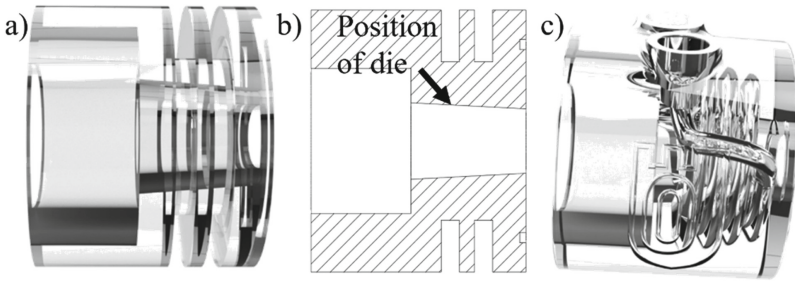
CAD models of the two tool holders a) the conventional direct cooled b) a schematic cut view of the conventional tool holder c) the new printed design with conformal cooling channels.
